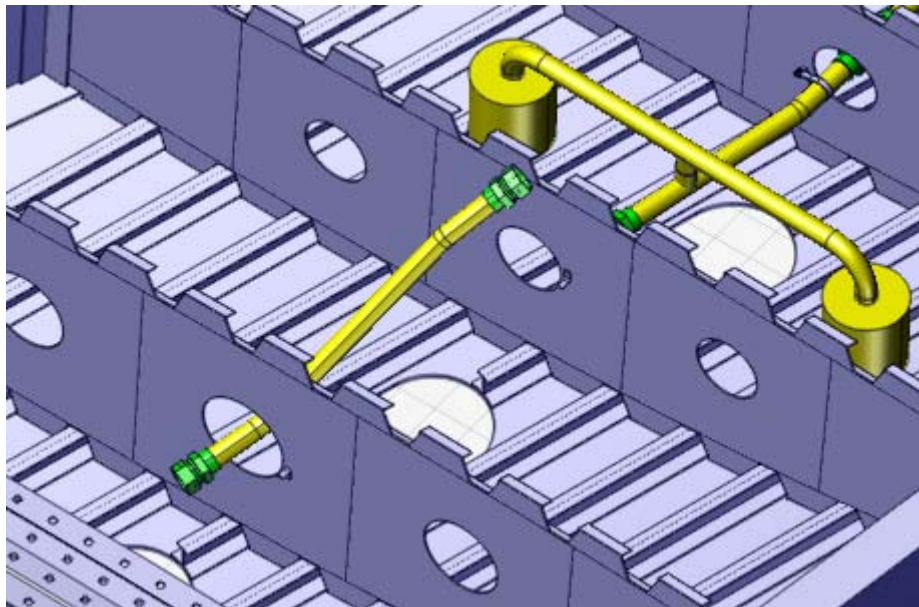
Assembly Simulation of Right Wing Fuel System Pipes
